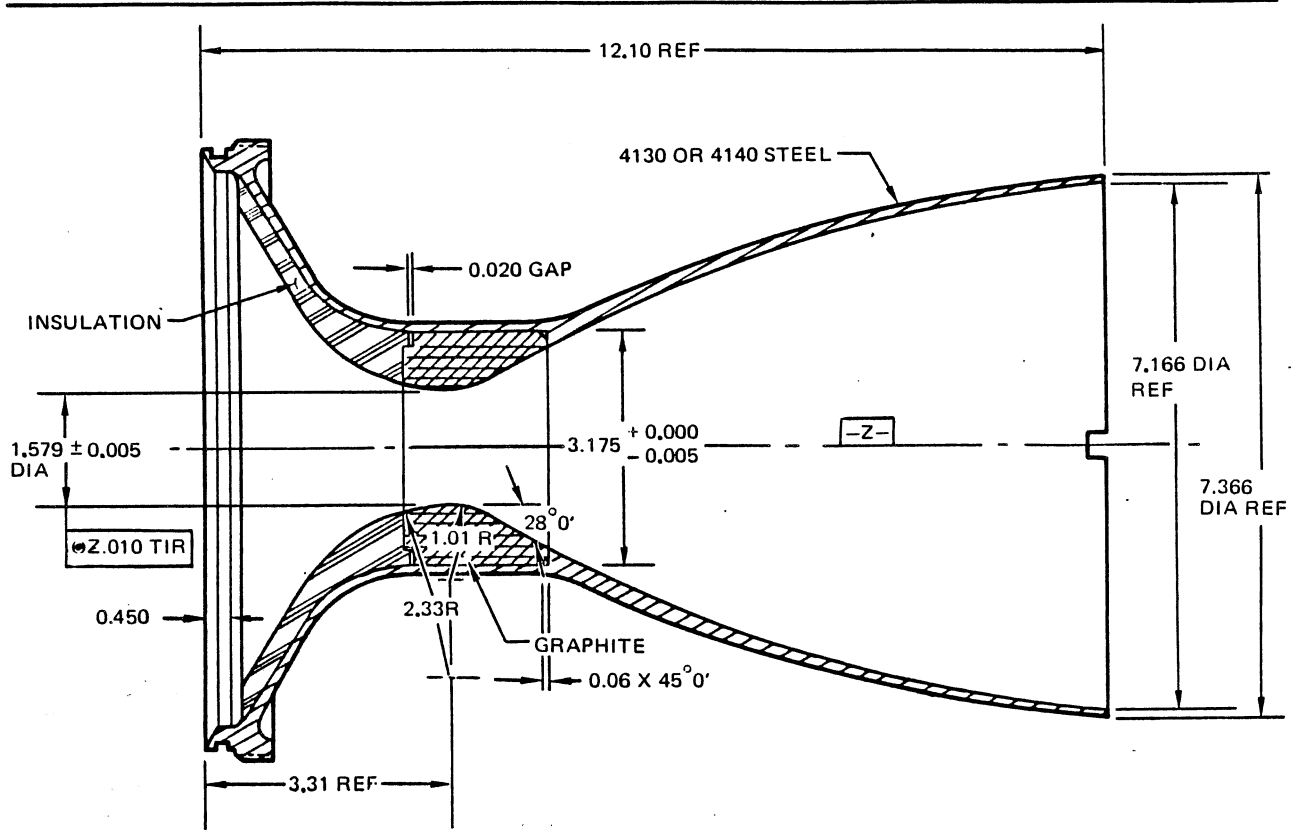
Ullage Rocket Motor Nozzle Assembly
